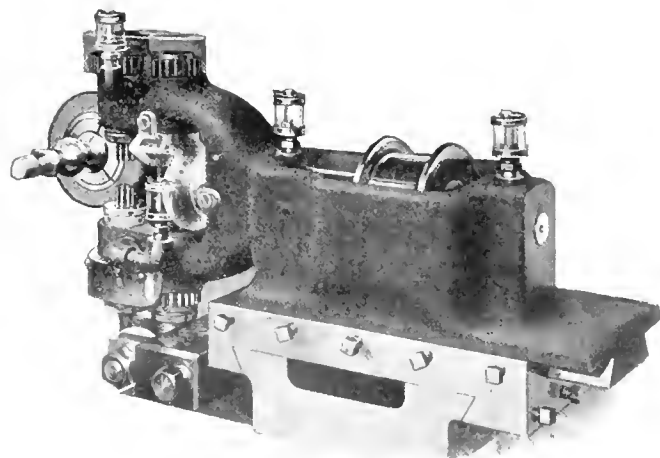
Milling Attachment for the Acme Multiple Spindle Automatic Screw Machine, showing Work Formed, Threaded and Milled in the Machine
